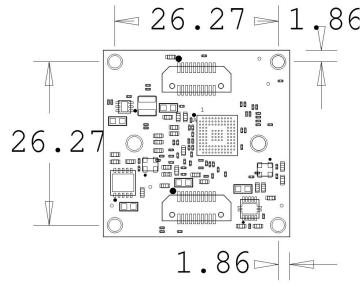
Rear Portion of See3CAM_CU30_CHL_TC Module Board mechanical dimensions
